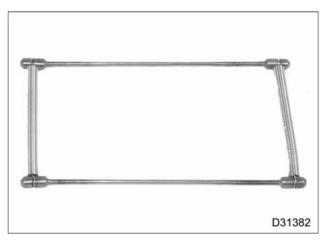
Piston Gauge Pins (0.082 in) ZTSE4513
